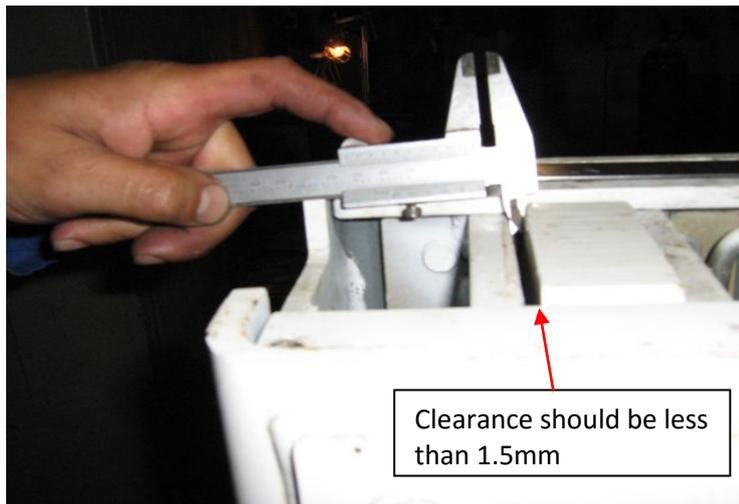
Clearance between cylinder clevis end and mounting plates. (Should not exceed 1.5mm)
